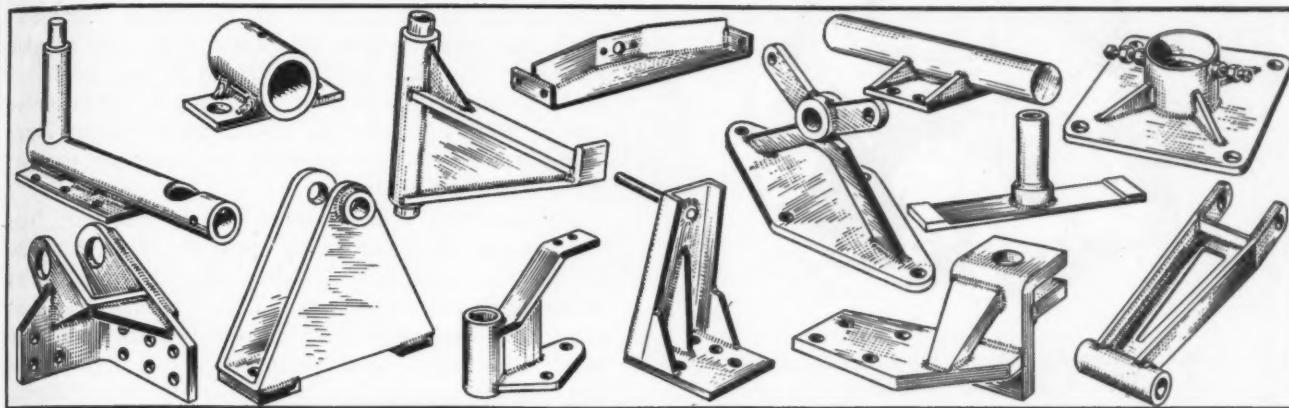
Typical machinery brackets for various applications built at lower cost with arc welding.
